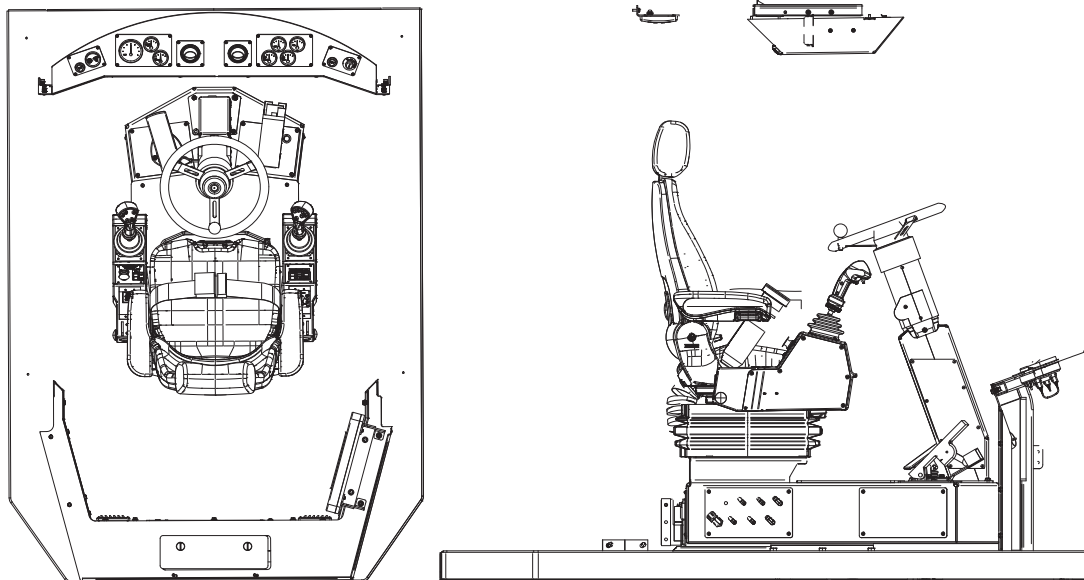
Standard Operator's Cab With Rotate Seat Platform
